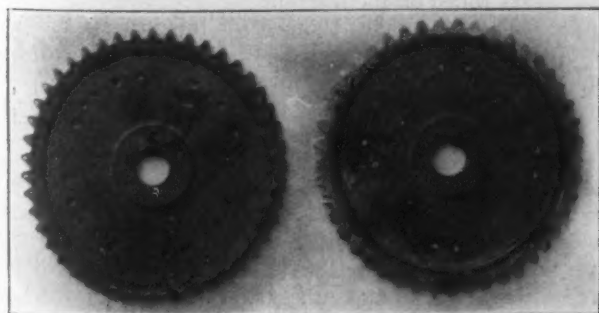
A Pair of Spur Gears Rolled on the Machine.
